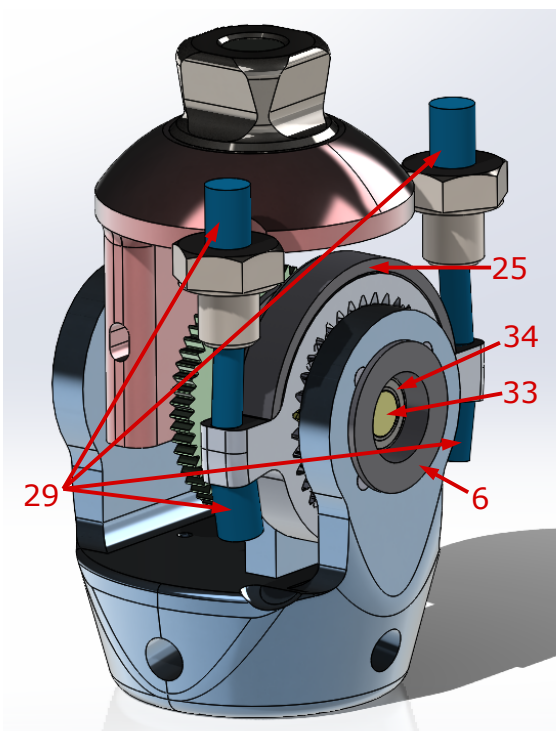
Front view of the CAD design excluding the upper structure. (6) Plain bearing for guidance, (25) Sectioned plain bearing between the ring gear and the upper structure, (29) End crimps, (33) Sun shaft, (34) Sun bearing.
